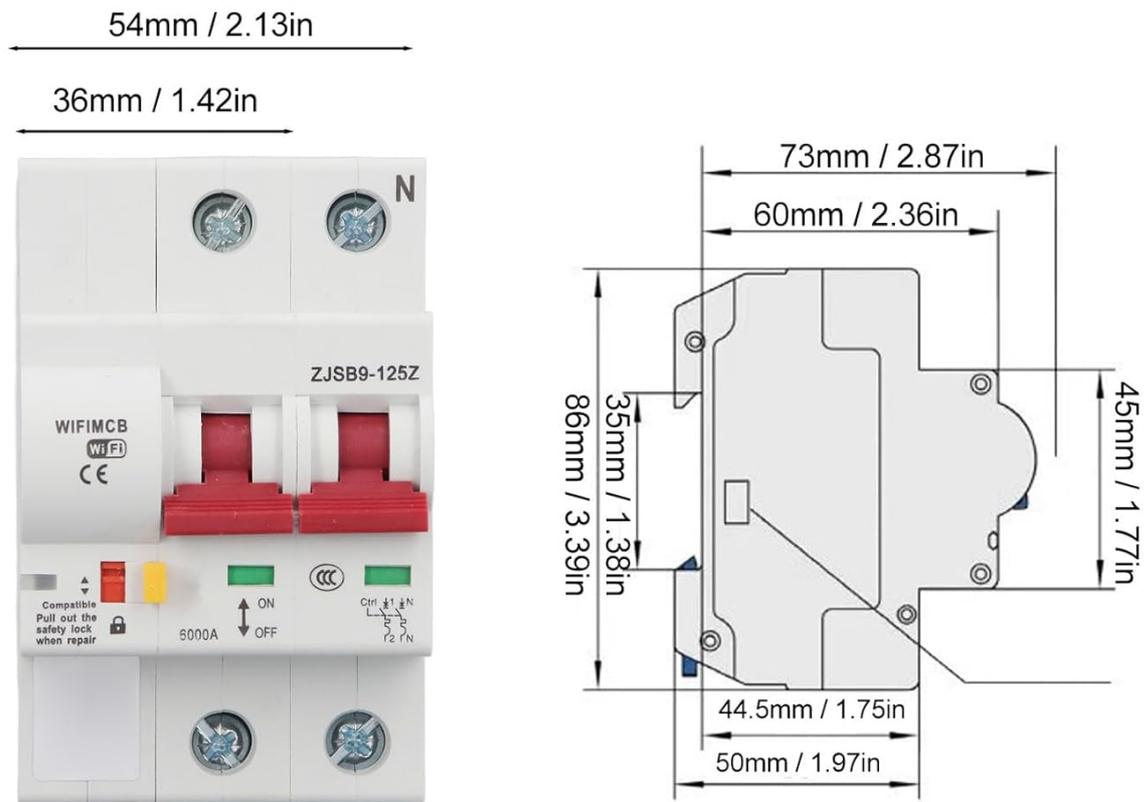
Dimensional drawing of the circuit breaker with measurements in millimeters and inches.
